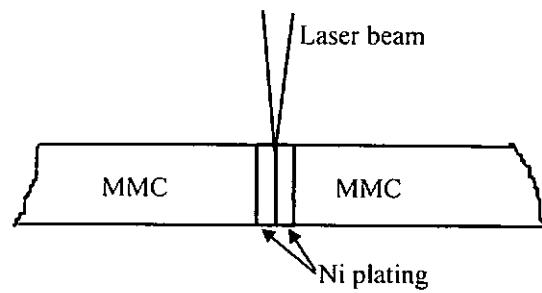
Butt-joint laser welding of MMC with Ni plating.
